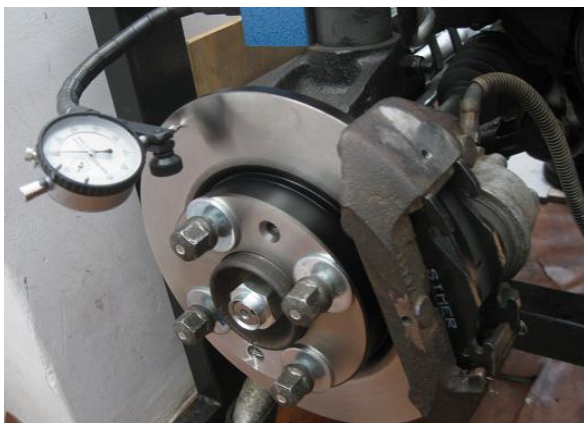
Check brake disc lateral run-out with a Dial Indicator
